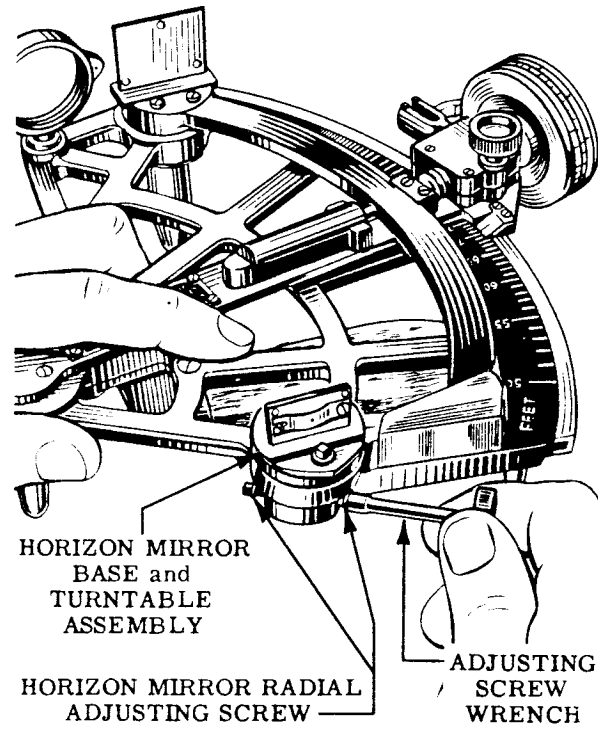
Removing the Horizon Mirror Base and Turntable Assembly
